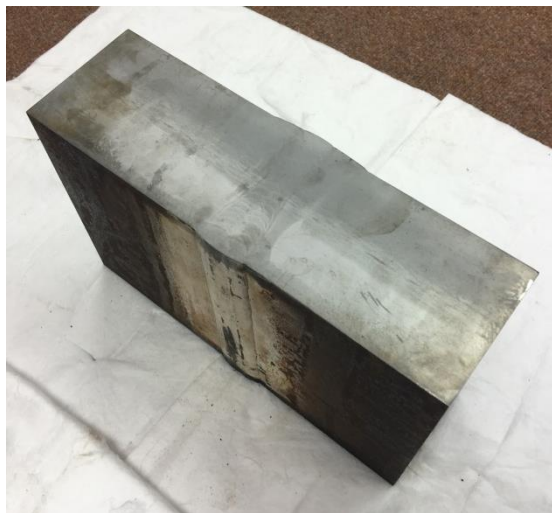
Smaller sectioned welded plate for the extraction of C(T) samples
